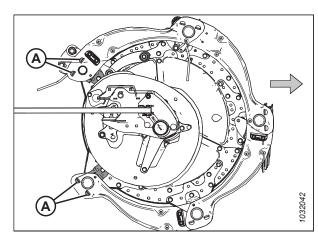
Reel Endshield Removed – Outboard Cam End
